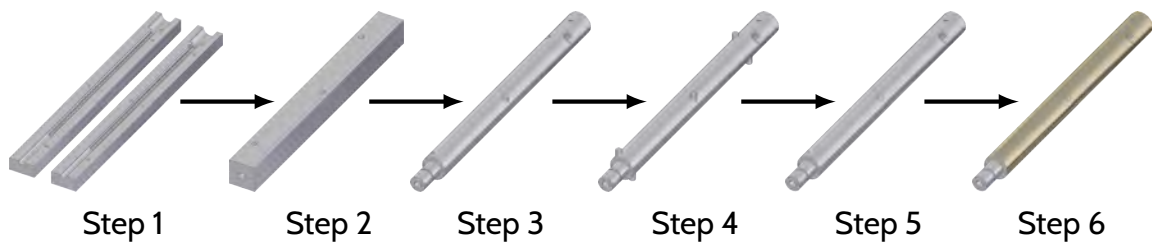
Step-by-step progression of building the fuel rod sections. Steps are as follows: 1) Machine internal portion of rod halves from aluminum barstock, 2) Bolt two rectangular halves together, 3) Machine block into cylinder roughly larger than final diameter then separate the halves and glue thermocouples in place, 4) Bolt rod halves together and insert plugs into bolt head counterbore locations and fix in place with machineable aluminum epoxy, 5) Machine cylinder to final diameter, and 6) Use chemical deposit nickel plating to treat surface that will be in contact with fluid.
